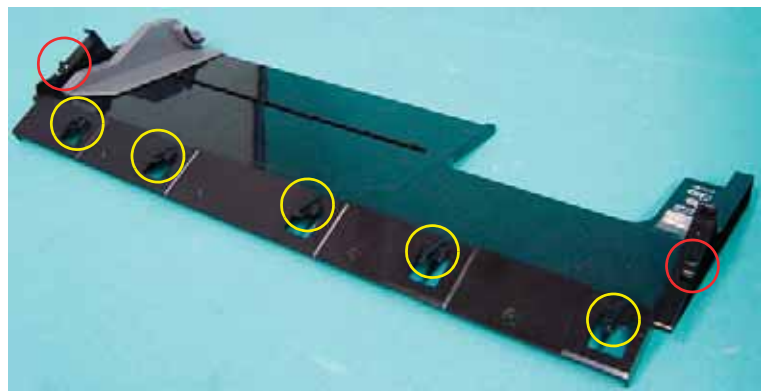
Removing the PAPER, SUPPORT, MANUAL, ASSY.
